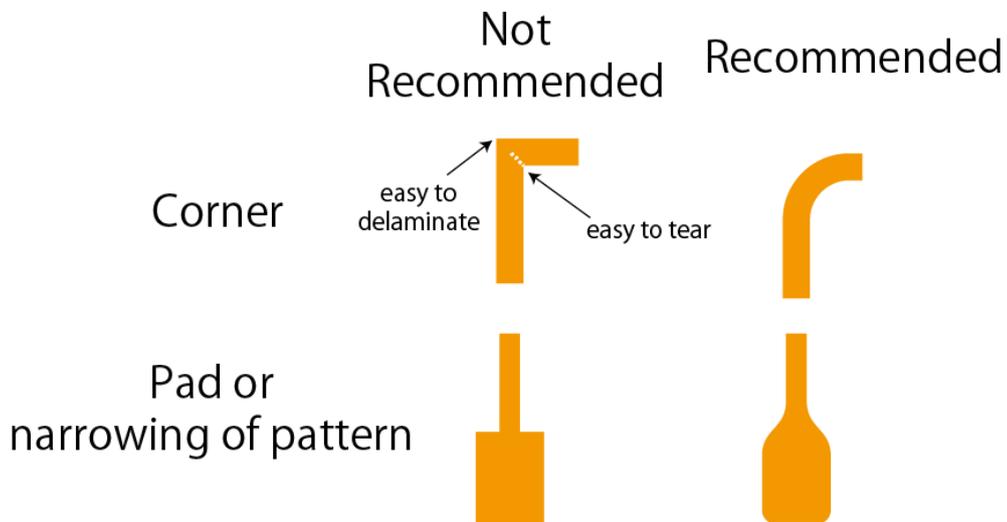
Good and bad examples of the shape for corners in wiring and parts of variable wiring width and land
